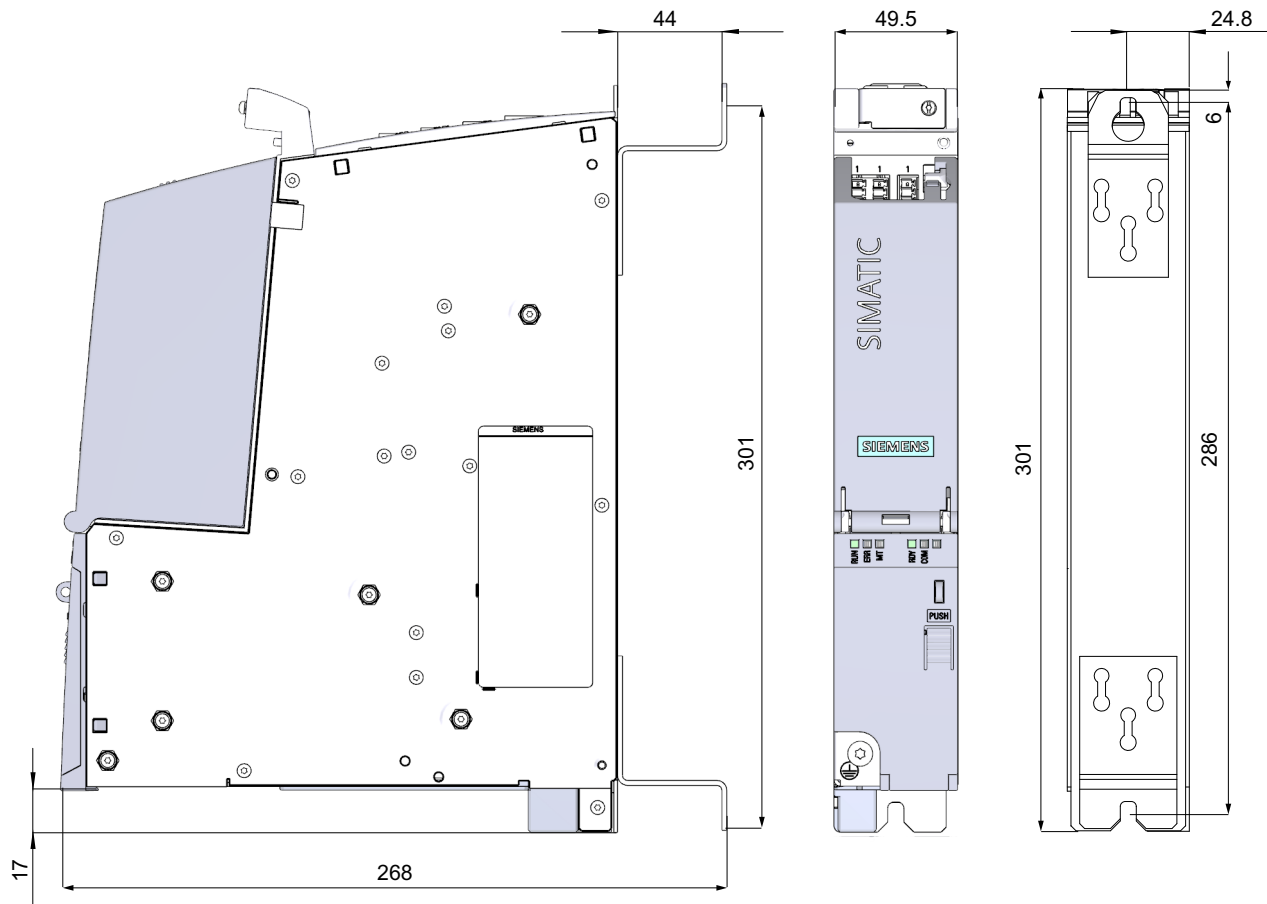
Dimension drawing of SIMATIC Drive Controller
